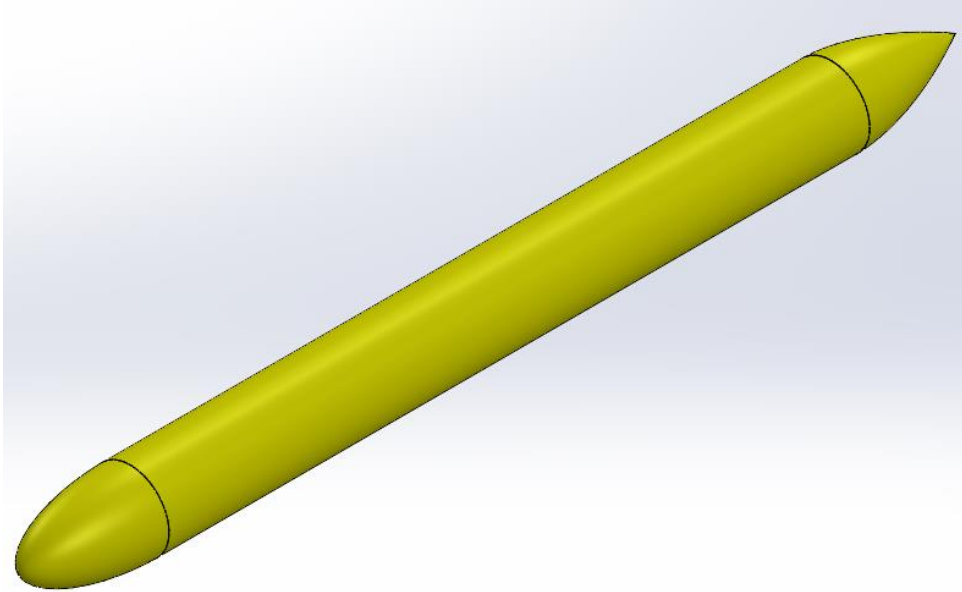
SolidWorks Model of the UUV Shape Used in Our Tool
